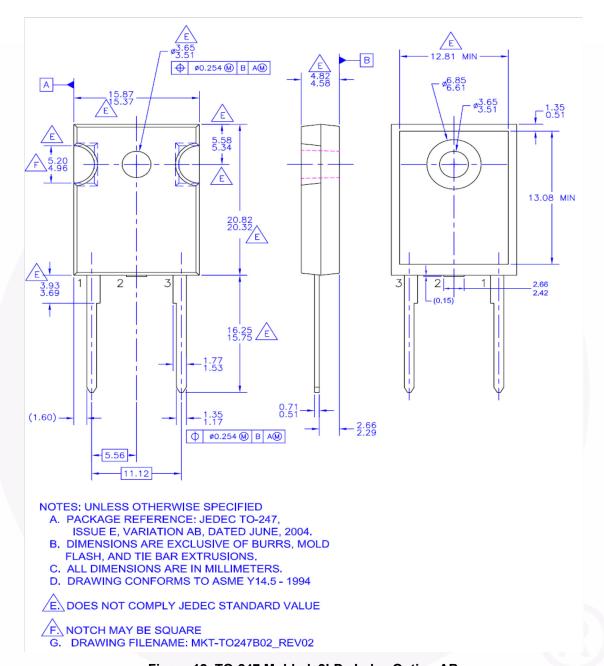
TO-247, Molded, 2LD, Jedec Option AB
